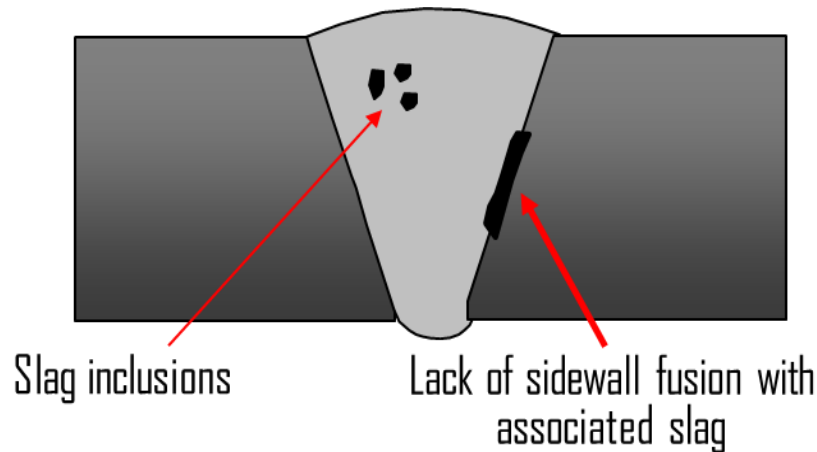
Section showing location of slag inclusion in weld metal (Parma, 2010)
